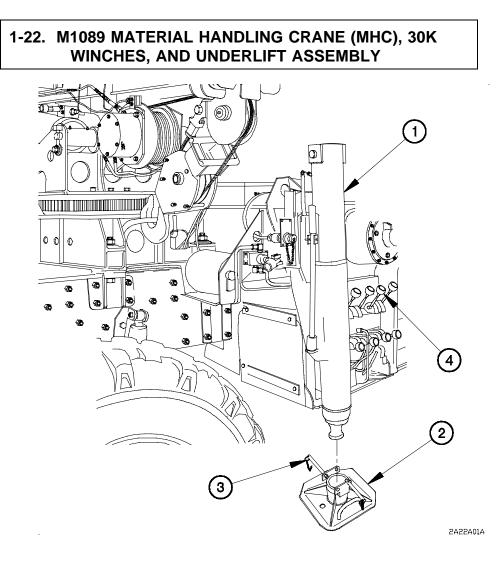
Material Handling Crane (MHC), 30K Winches, and Underlift Assembly
